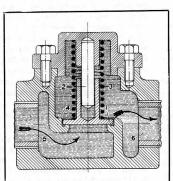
Type B Spring-Loaded Check Valve. This drawing is merely schematic to show the general principle involved in this type valve. Many variations in form are possible. Valve (1), guided on fixed pin (2), is normally closed under pressure of spring (3). Shoulder (4) requires valve to lift high above valve seat, so avoiding chatter. Fluid enters through valve inlet (5), and establishes a pressure below valve (1) sufficient to overcome spring loading, plus fluid or vapor pressure above valve. Fluid then passes to upper part of valve housing and is discharged through port (6). Reference to Fig. 4 will show position of this valve in the complete assembly line.
